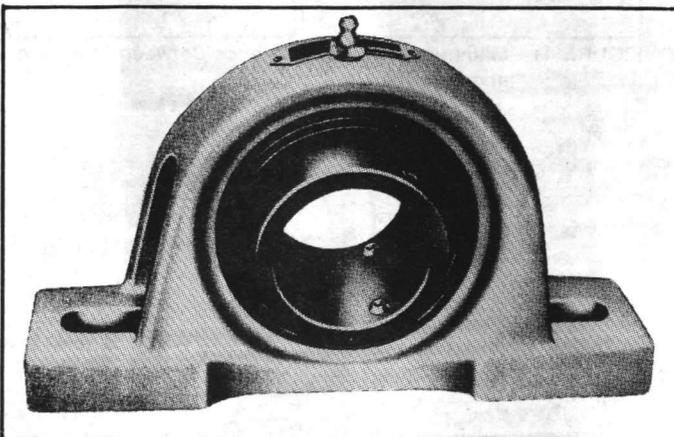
Pillow Block Type Bearing with Grease Fitting and Double Lock Setscrew Arrangement
